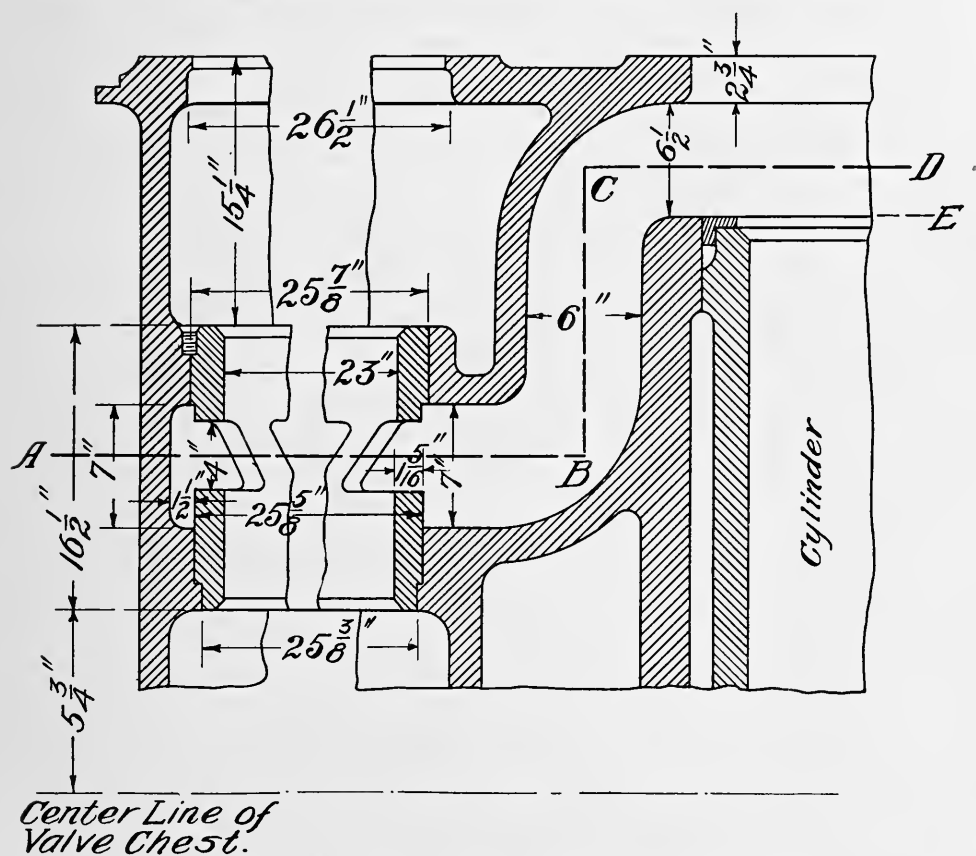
Top Valve-Chest Liner and Steam Port.
